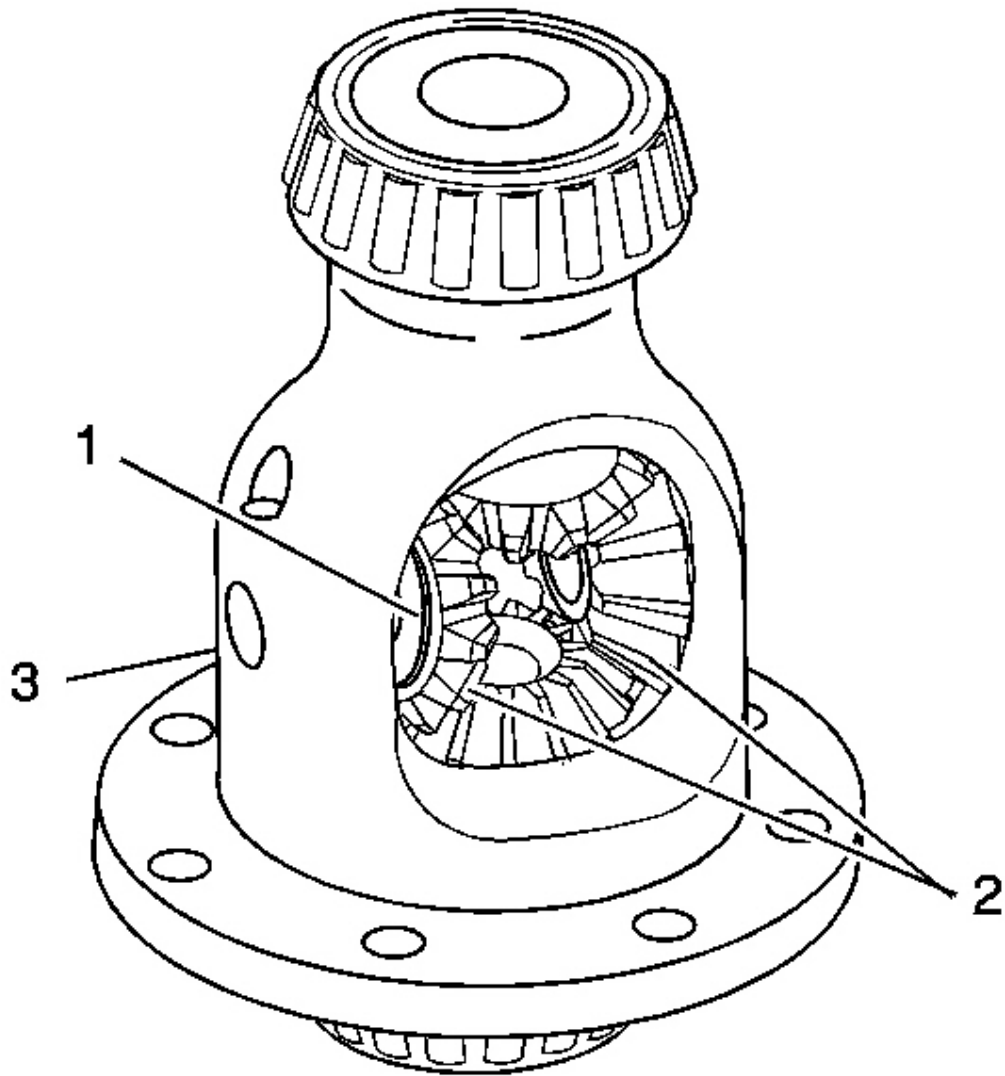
Removing Washers, Pinion Gears & Side Gears
